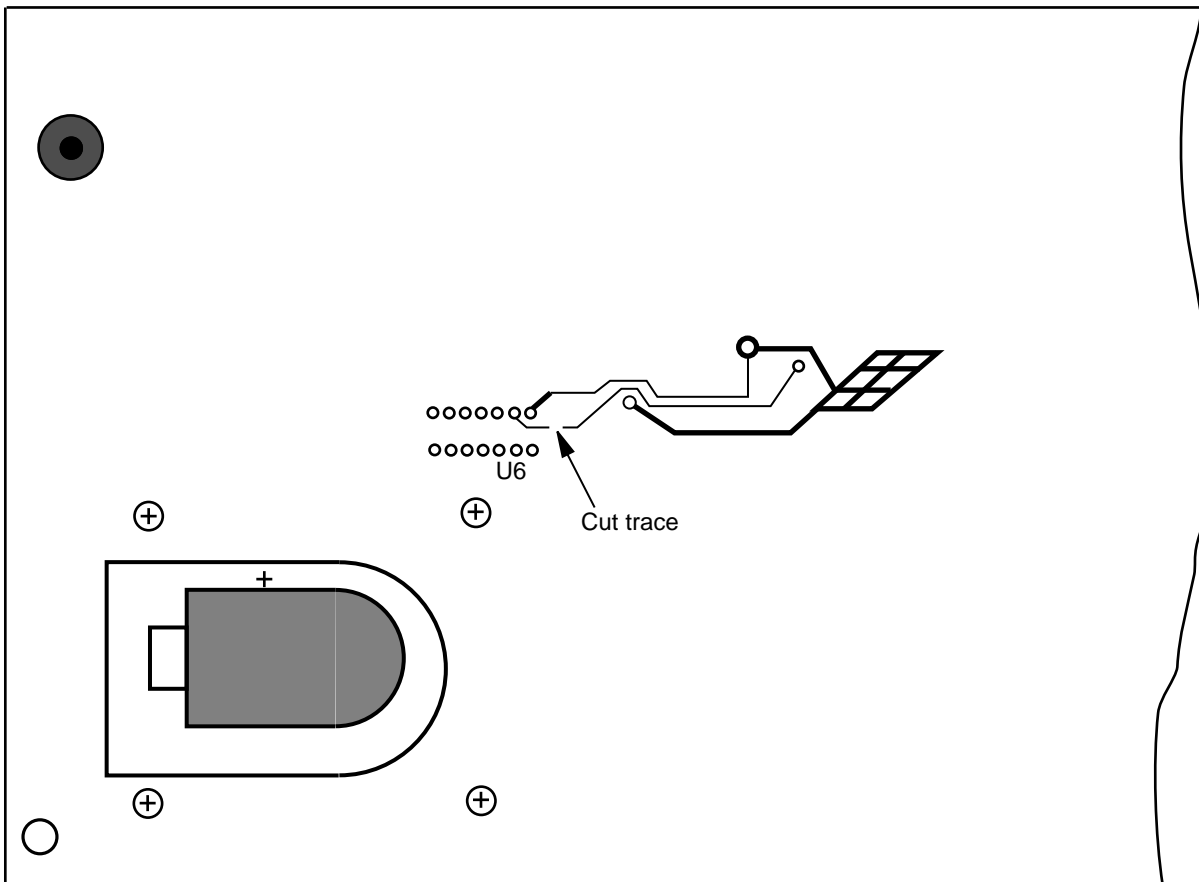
Location of Solder Side Trace Cut on Late Model Keyboards
